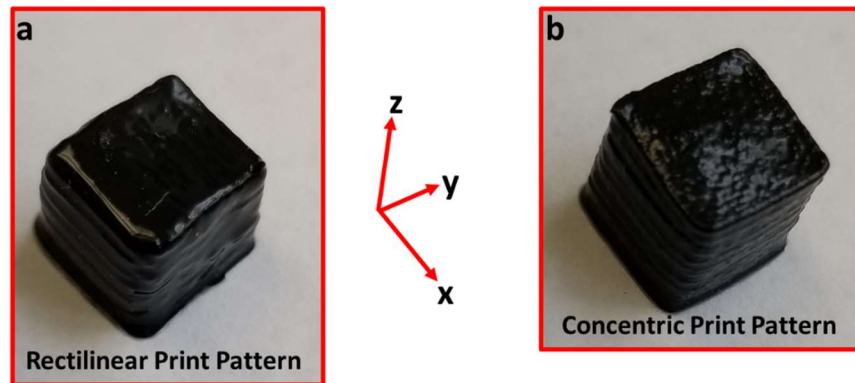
Trimetric views of the resulting 3D printed cubes from (a) rectilinear and (b) concentric patterns.
